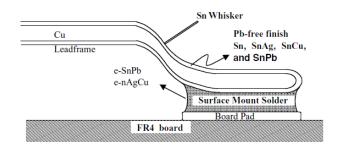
Schematic Diagram of a Surface Mount Solder Joint
